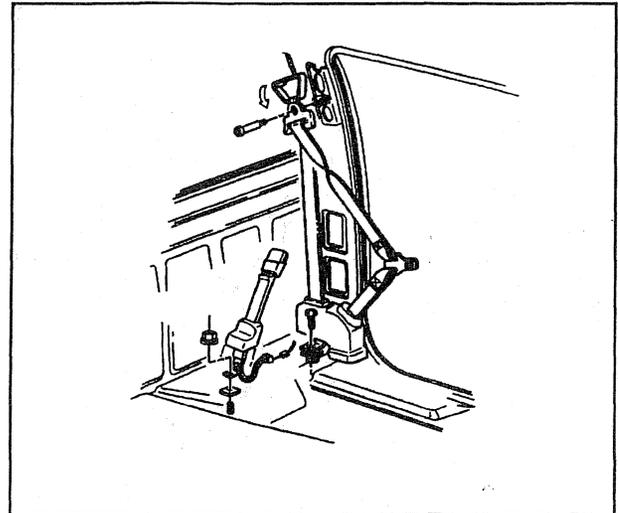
Front Seat Belts (Regular Cab with Bucket Seats)
